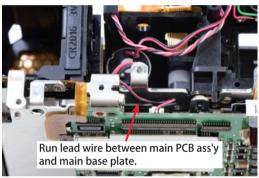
Routing Lead Wire on Main PCB Ass'y (1)
